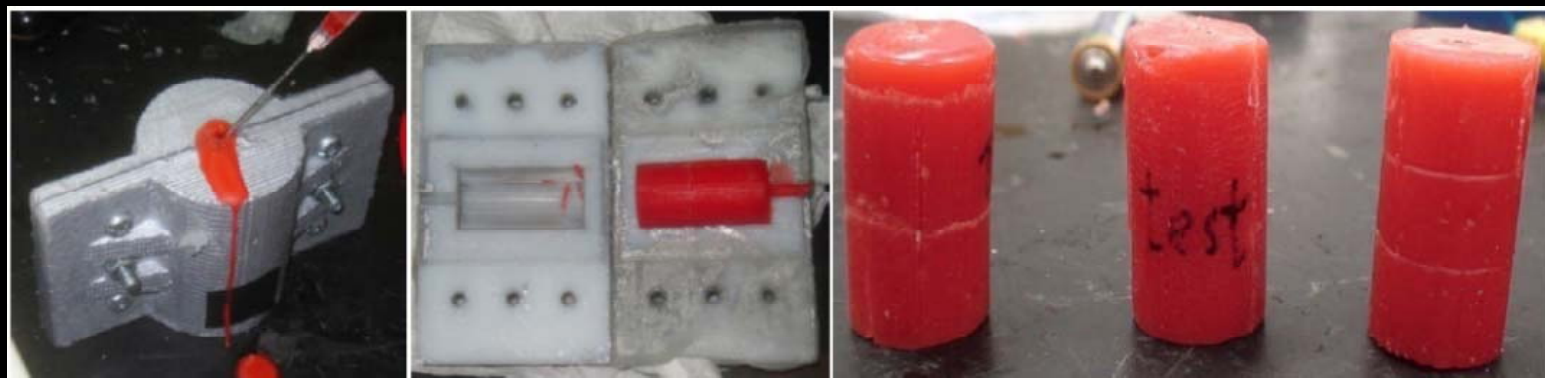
Wax injection (left), mold open (center), completed pattern (right).
